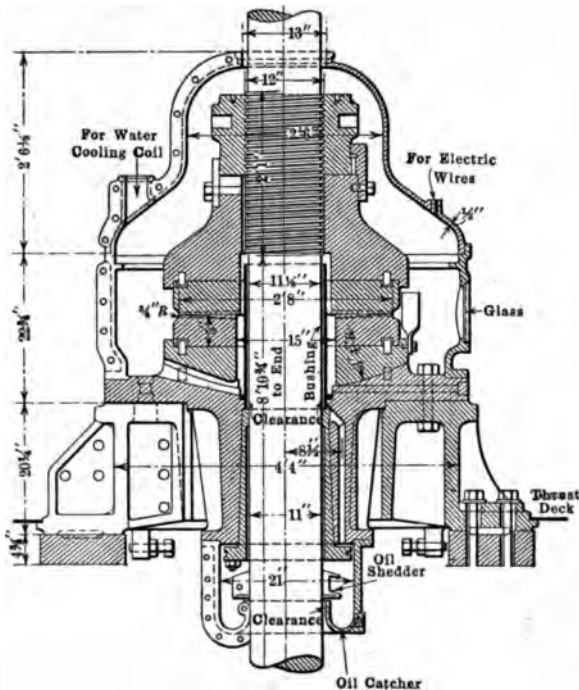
Oil-pressure thrust bearing. Niagara Falls Power Co.
